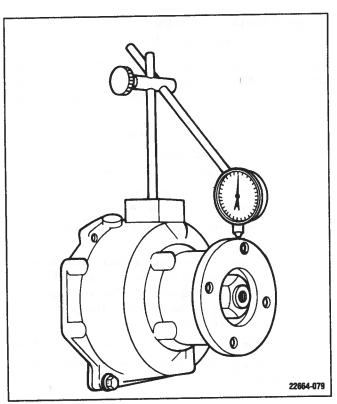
Checking Coupling Outside Diameter – Rotate One Complete Turn
